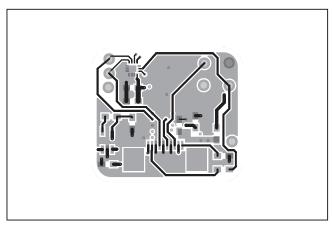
MAX30102 Daughter Board PCB Layout—Layer 2
